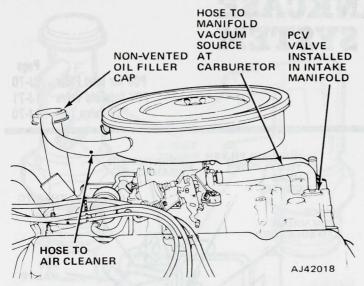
J-126 PCV System—Eight-Cylinder Engine
